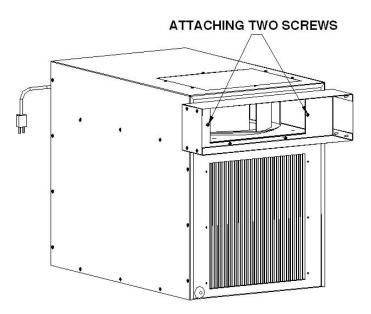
ATTACHING THE ADAPTER OF HOT-AIR EXHAUST DTCT HOOD
